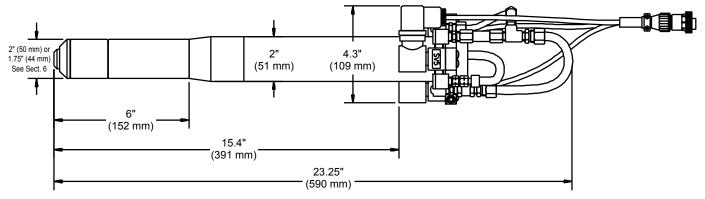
LHF Machine Torch (standard torch shown. See Section 6 for figure of stainless steel torch)
